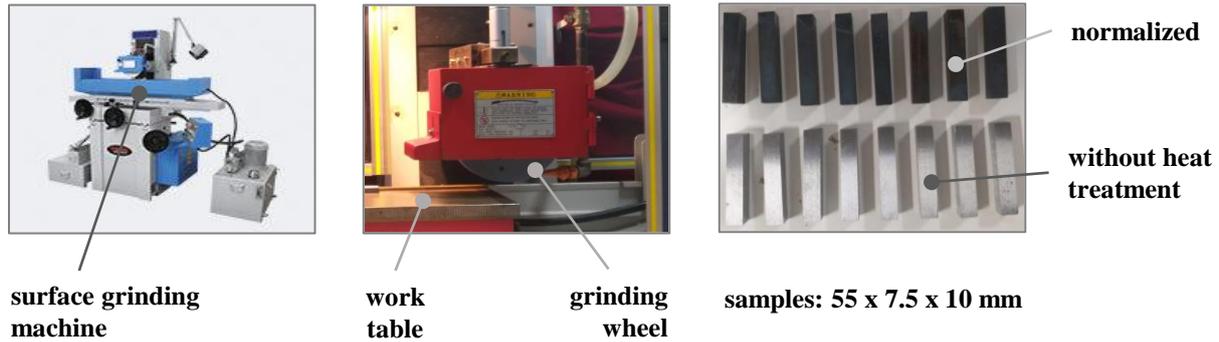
Benner RVK-4515 grinding machine, Al₂O₃ grinding wheel, and AISI 1020 steel samples.
